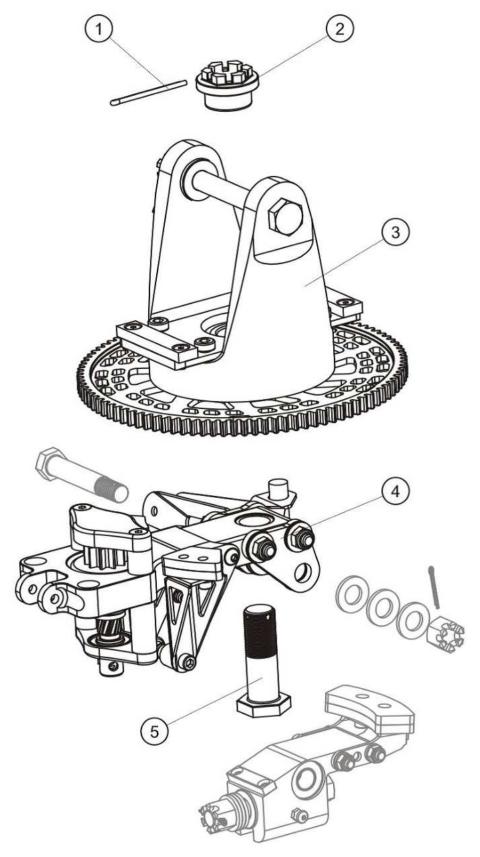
Rotorhead Bridge, Bearing and Teeter Tower
